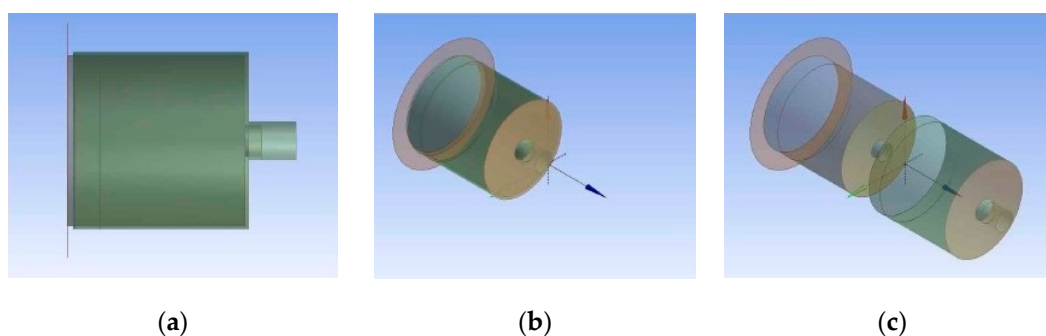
Magnet coupler three-dimensional (3D) models of the bulkhead and outer rotor. (a) Side view of the bulkhead and outer rotor together, (b) an isometric view of the bulkhead and outer rotor, (c) the exploded view of bulkhead and outer rotor.
